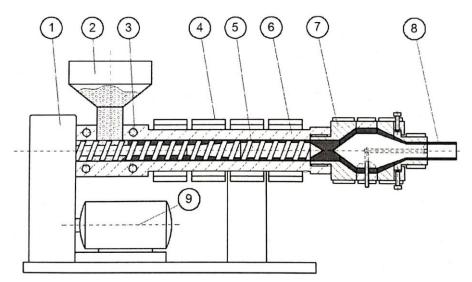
Schematic of a single-screw extruder; 1 - gearbox, 2 - hopper, 3 - cooling system for the feed zone, 4 - heating and cooling system, 5 - screw, 6 - barrel, 7 - die, 8 - extruded product (pipe), 9 - drive motor [2].
